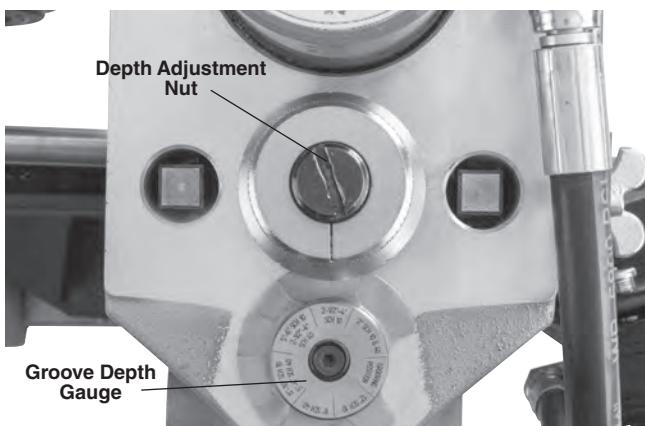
A – Place Correct Step of Gauge Under Adjusting Head
